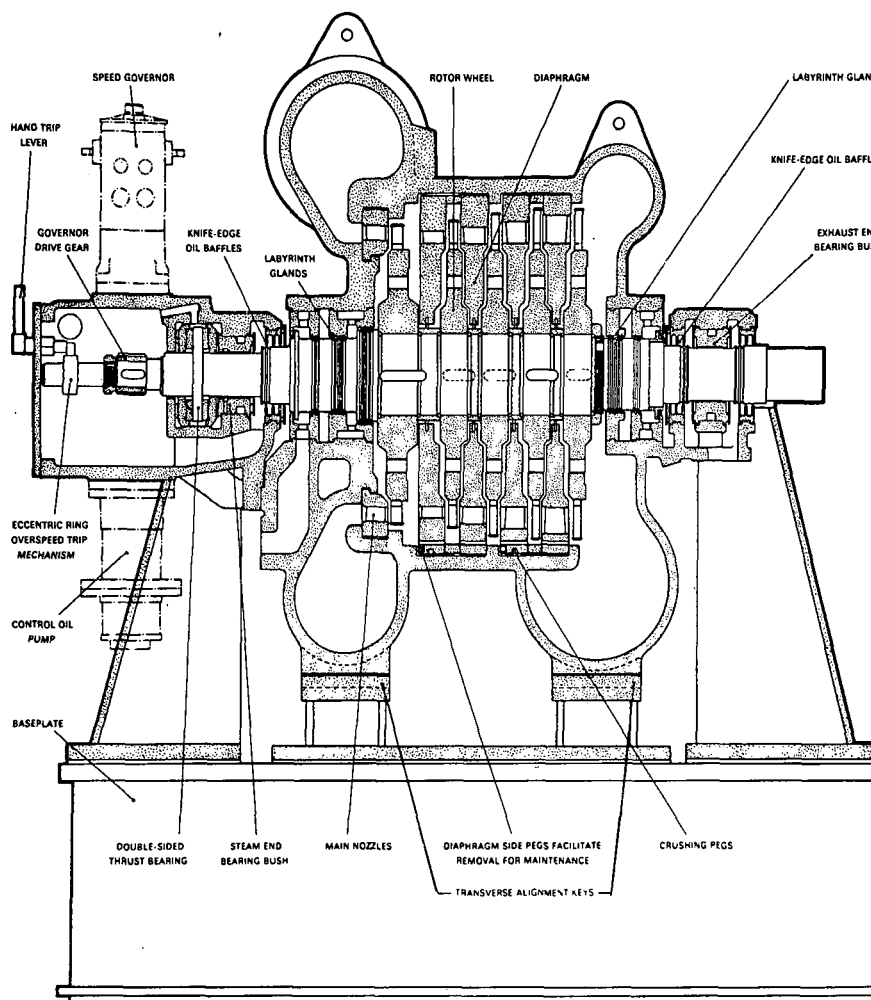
Longitudinal sectional arrangement of SLC 22 turbine.
